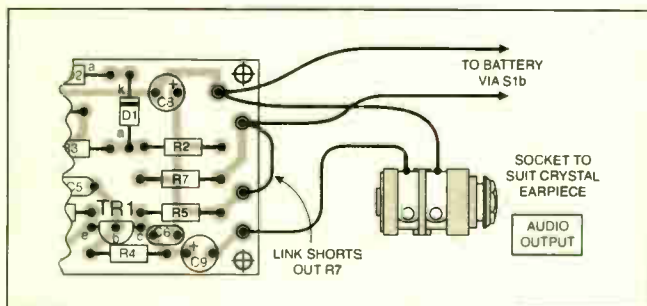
Connecting a crystal earpiece, via socket, directly to the p.c.b. in place of the Volume control. Note the "shorting" link wire.
